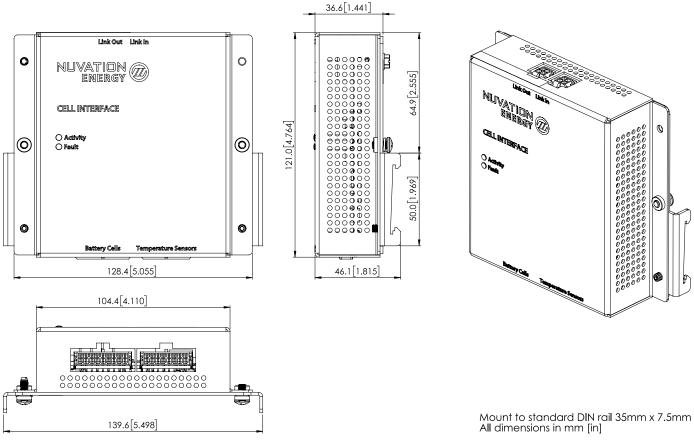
Mechanical Drawing of G4 Cell Interface with G4 Cell Interface Mounting Bracket (Bulkhead-to-DIN)
